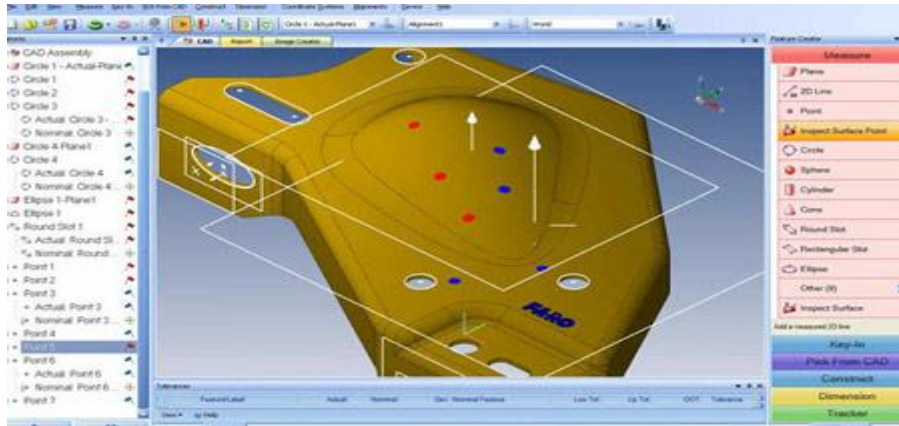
Create fully surfaced CAD models of design concepts or replacement parts.( Reverse Engineering)
